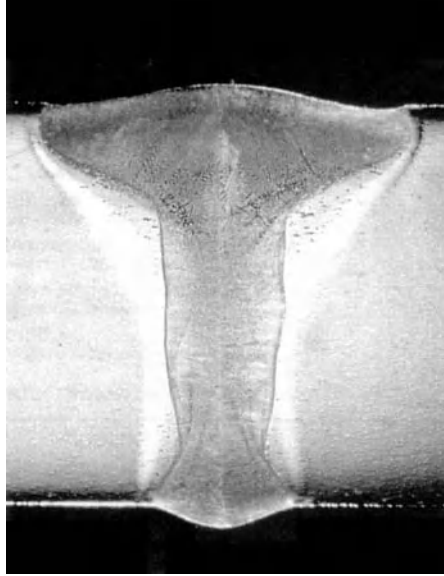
CO₂ laser beam weld of 6 mm thick Inconel 718 (Institut de Soudure document)
